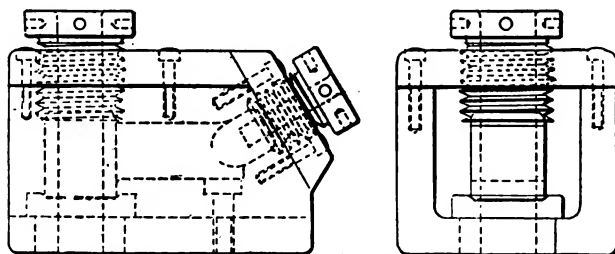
Jig for Drilling Work Shown in Fig. 59
